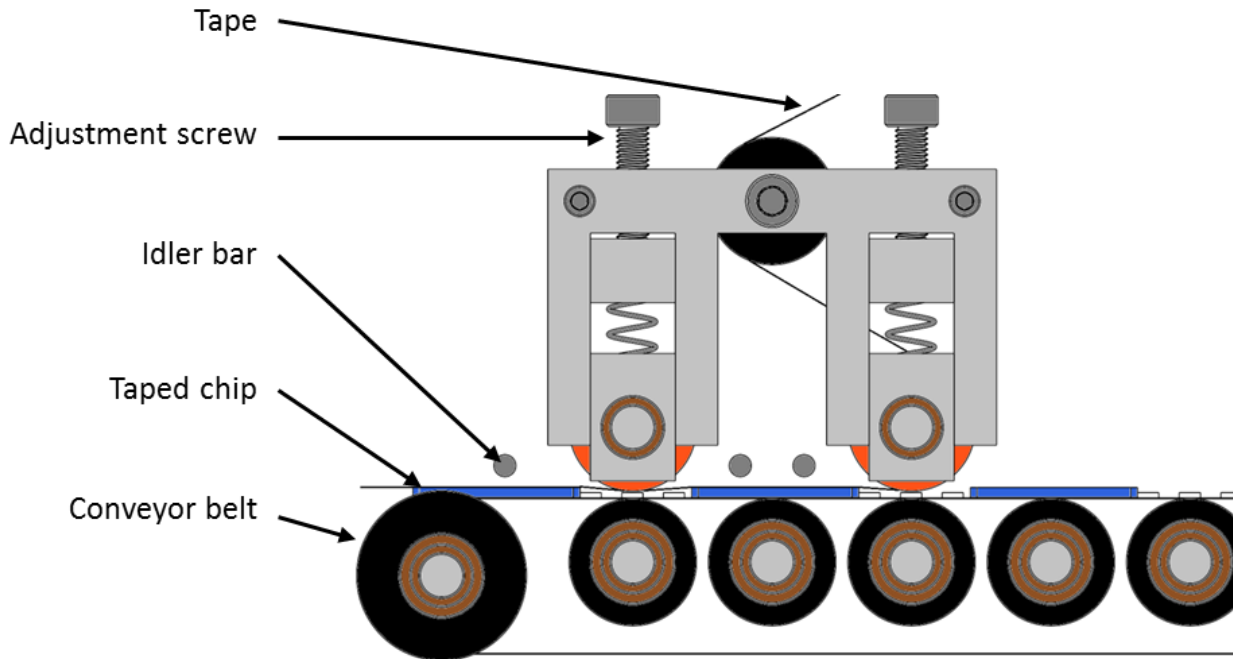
The new force application mechanism for the rollers of the taping machine. The spring force can be increased by tightening the screws above each upper roller. The chips are highlighted in blue and move on a conveyor belt from right to left in this diagram. Bars to prevent the chips from rotating up are shown between the two rollers and after the second roller.
